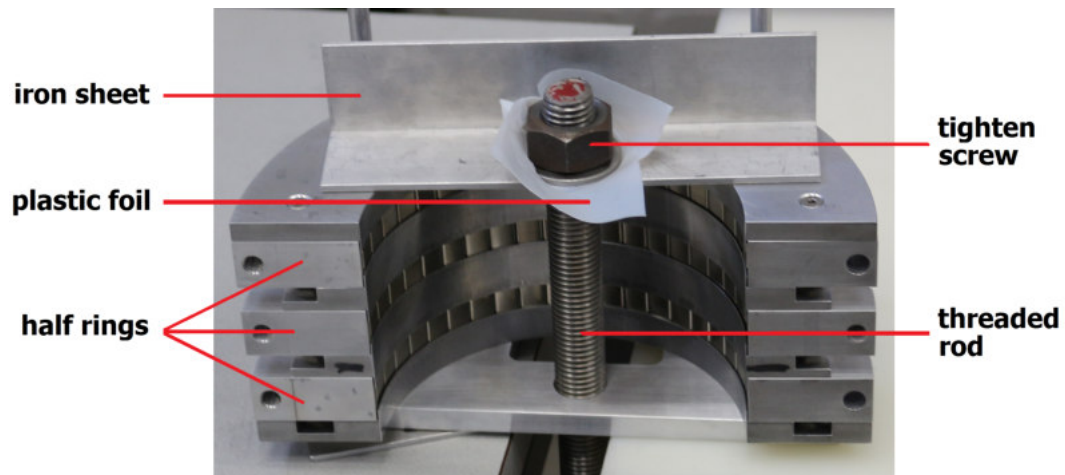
Only with use of a M20 threaded rod with nut the rings can be brought together. Afterwards the long guiding rods will be substituted by M8 threaded rods with nuts.
